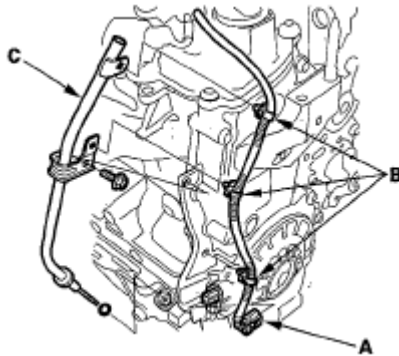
Locating Crankshaft Position Sensor, Harness Clamp & Dipstick Tube
